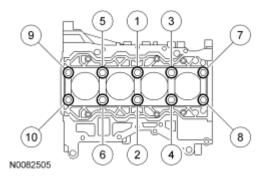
Identifying Main Bearing Beam Bolts Tightening Sequence
